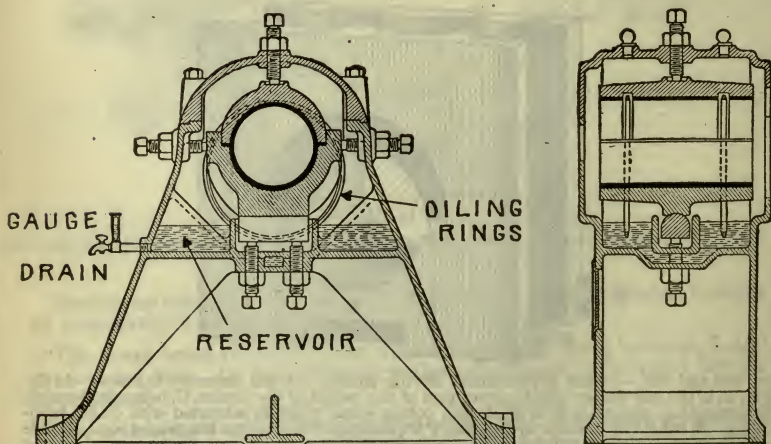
Outboard bearing and pillow block of the Murray-Corliss engine. By means of the wedge, bolts, and set screws as shown, the position of the bearing may be adjusted either vertically or horizontally. All engines that are not self-contained should have this type of outboard bearing to secure precision in alignment.
